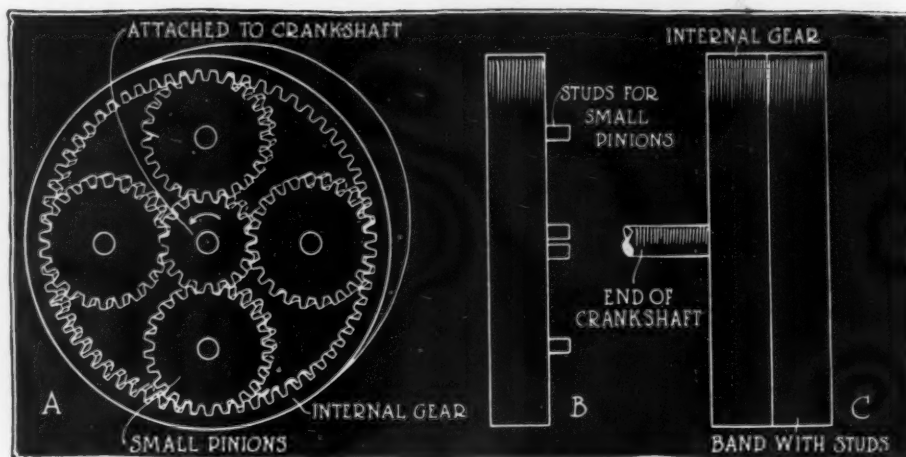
CONSTRUCTION OF PLANETARY GEARSET
